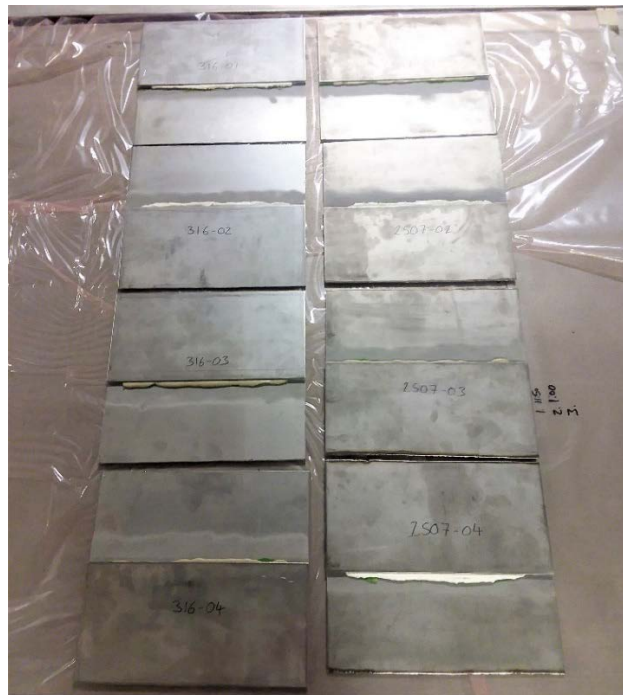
MMLS blanks bonded together before being waterjet cut to produce the MMLS specimens
